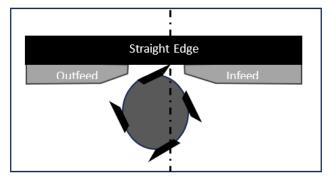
Alignment of the infeed/outfeed tables with the cutterhead.
